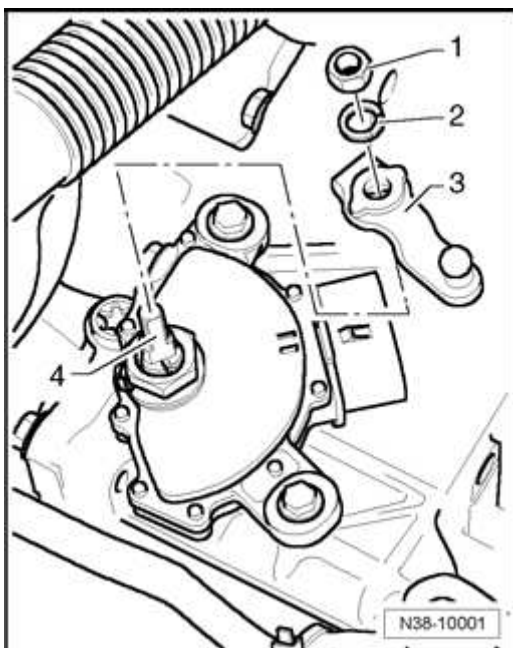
Removing/Installing Spring Ring And Lever At Selector Shaft
